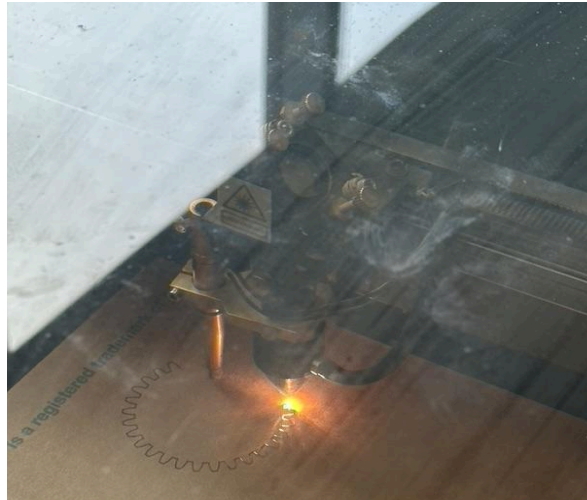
Image of laser cutting motor gears using $\frac{1}{4}$ in acrylic.
